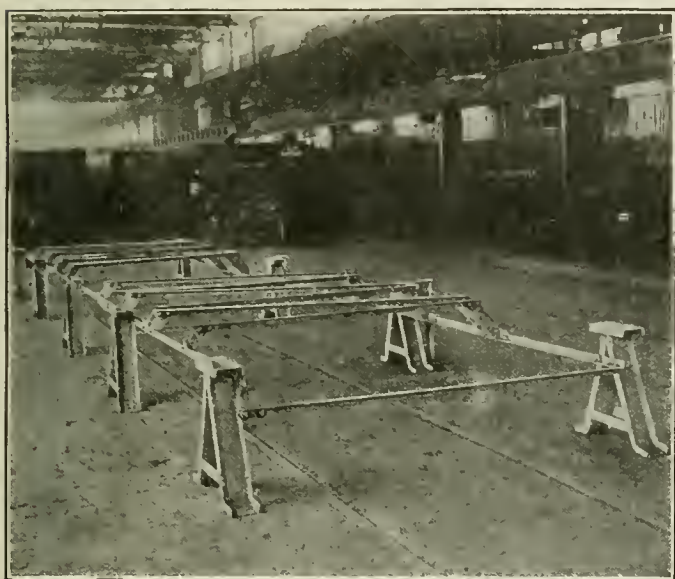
JIG USED IN ASSEMBLING SIDE FRAMES
